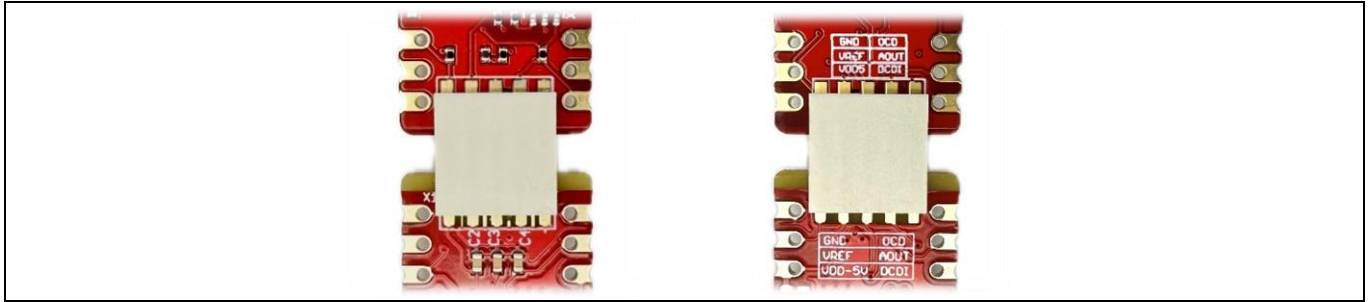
In-Plane Edge Connector Top and Bottom Setup
